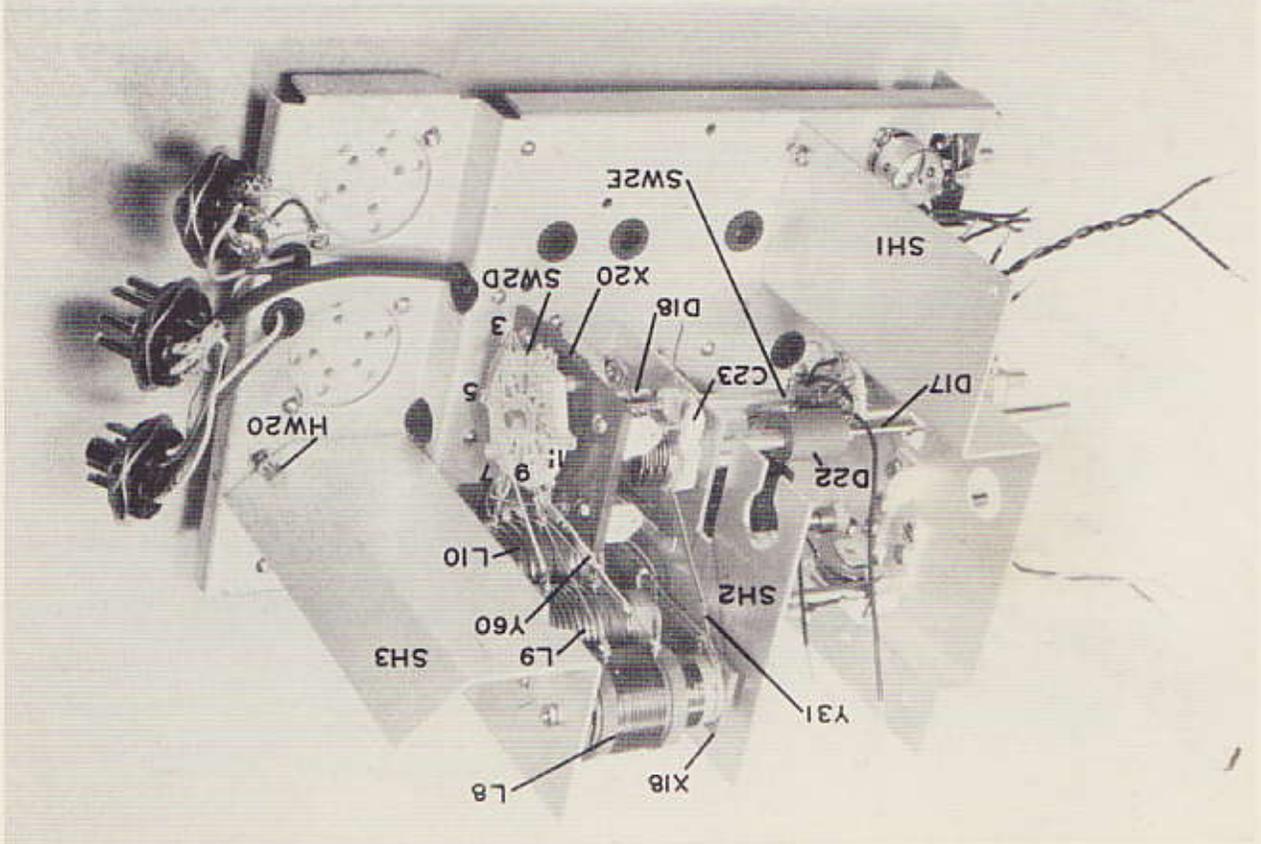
A SUBASSEMBLY MOUNTING-RIGHT VIEW
